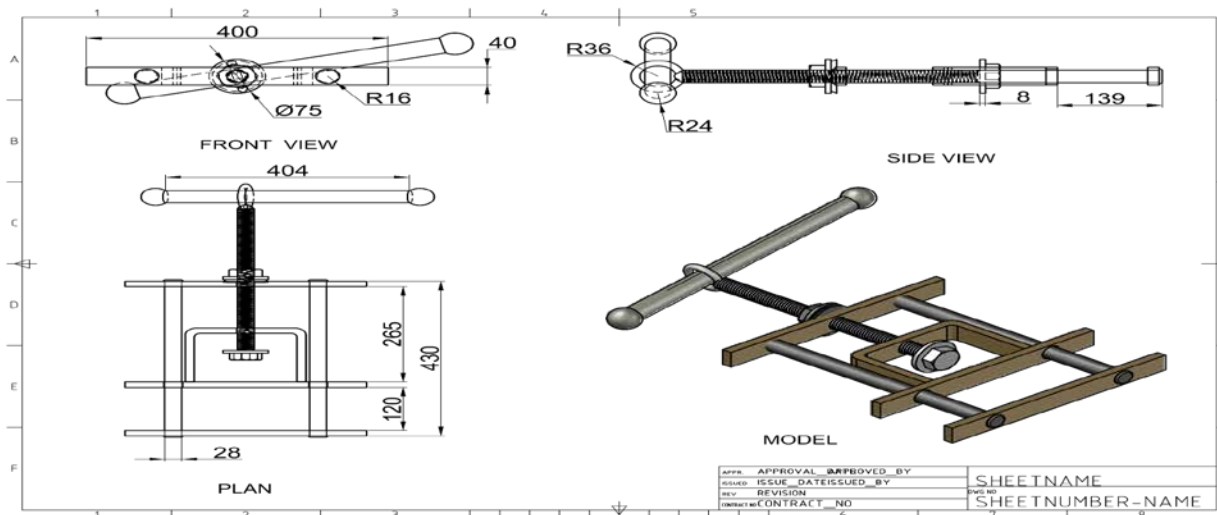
shows the orthographic views of the universal caliper piston compressor
